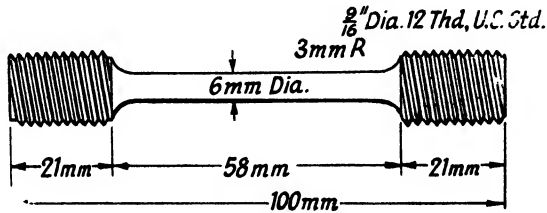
OLSEN IMPACT MACHINE TENSION SPECIMEN
